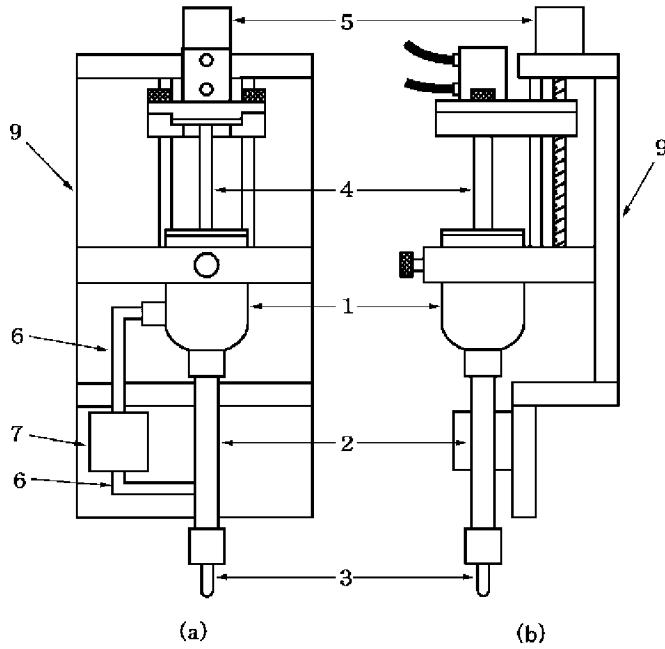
Furthermore, it is the key map showing other work examples, and (a) is a front view and (b) is a side view.
